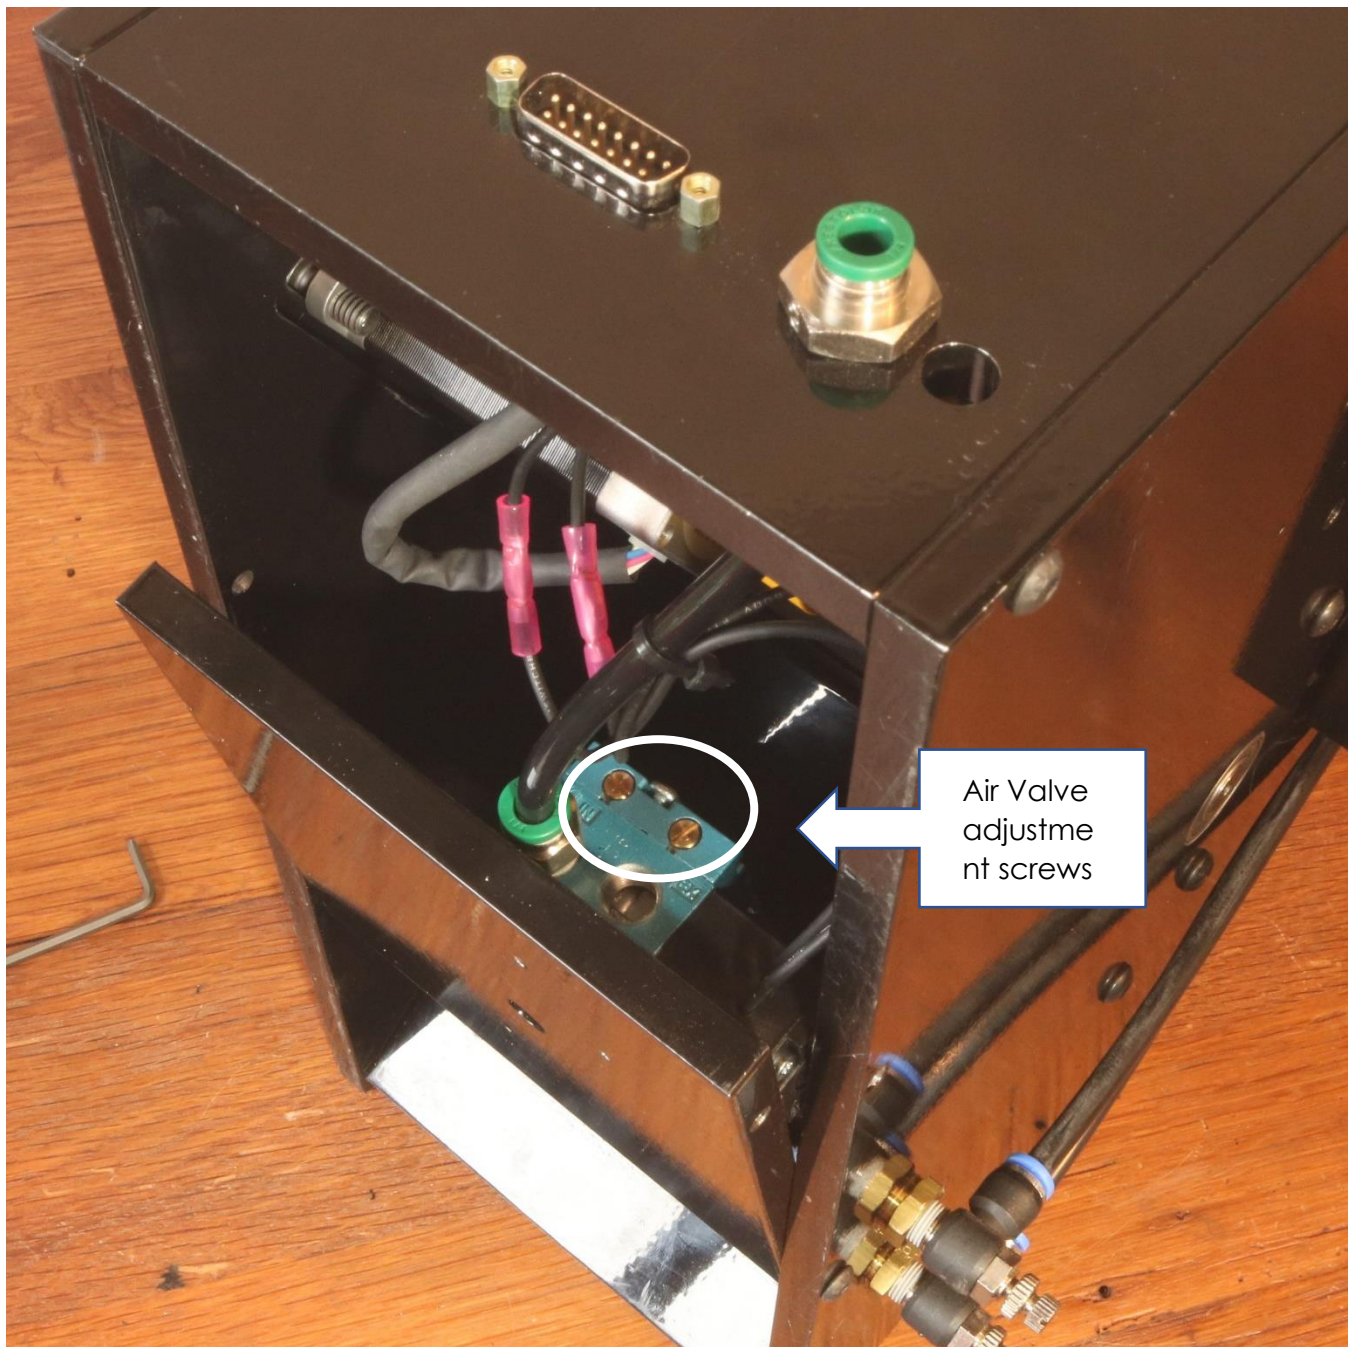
top view of machine from figure 17. The base plate has been hinged open for better access to the air valve. The two brass adjustment screws are visible. Note this particular machine is a cold cutter.
